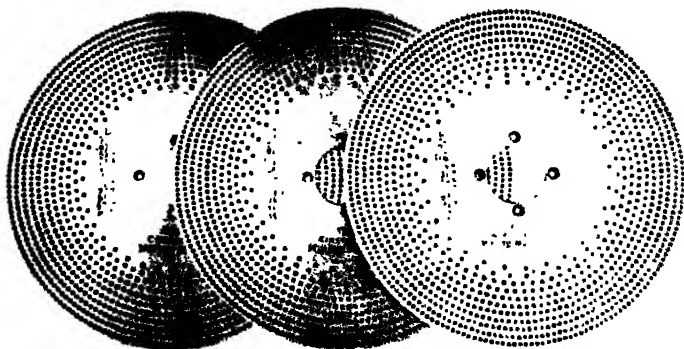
High-number indexing plates, drilled on both sides, giving a wider range of indexing. (*The Cincinnati Milling Machine Company*)
